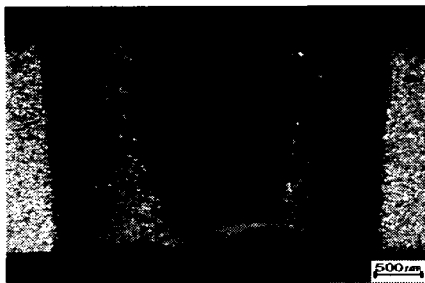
Butt welding (P=1500W, v=1000mm/min)
